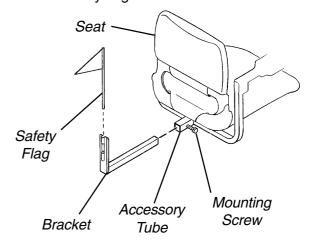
REMOVING/INSTALLING THE SAFETY FLAG
